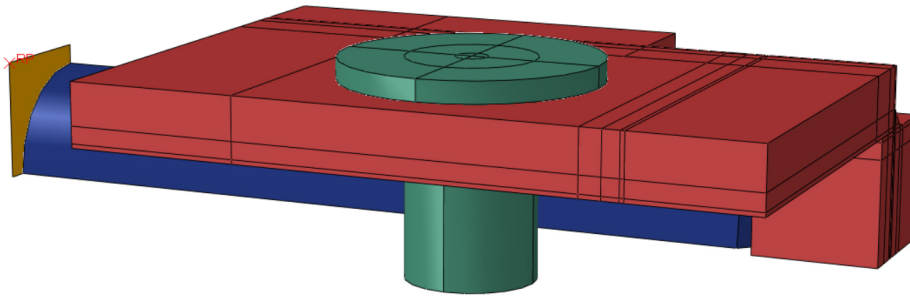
Assembly with all the parts for the dynamic test specimen with longitudinal fillet welds
